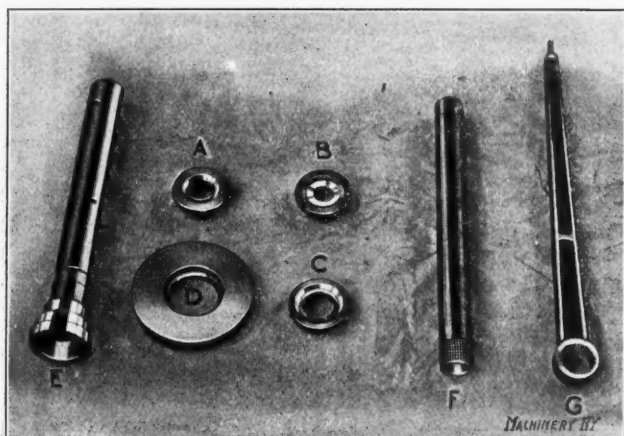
Tools for Corrugating Ends of Shafts, and Sample of Work
